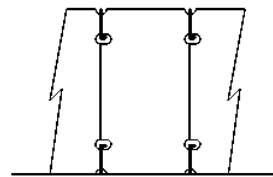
Block assembly methods 2e and 2f [2], [30]
